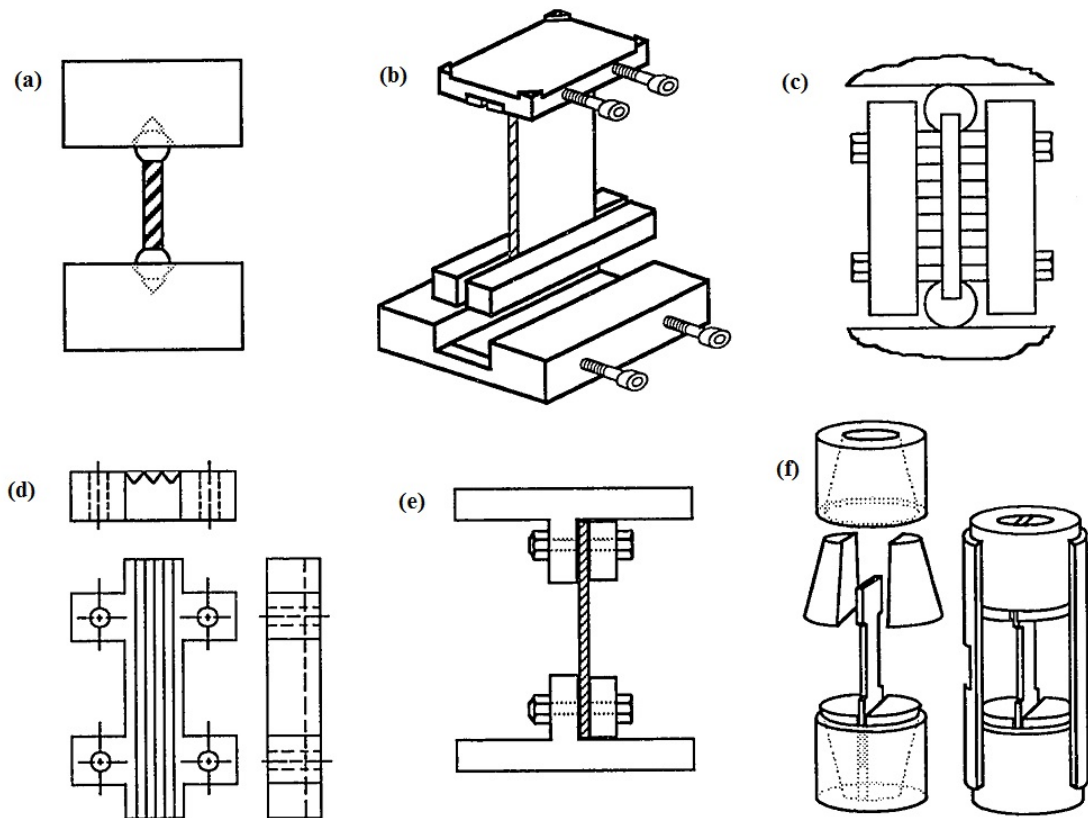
Various Compression Test Fixtures [11] (a) TEI fixture; (b) Narmco Test Method 303; (c) Sandwich Stanilized fixture; (d) ASTM D695-69 fixture; (e) Federal Test Method 406 fixture; (f) Celanese fixture [3]
